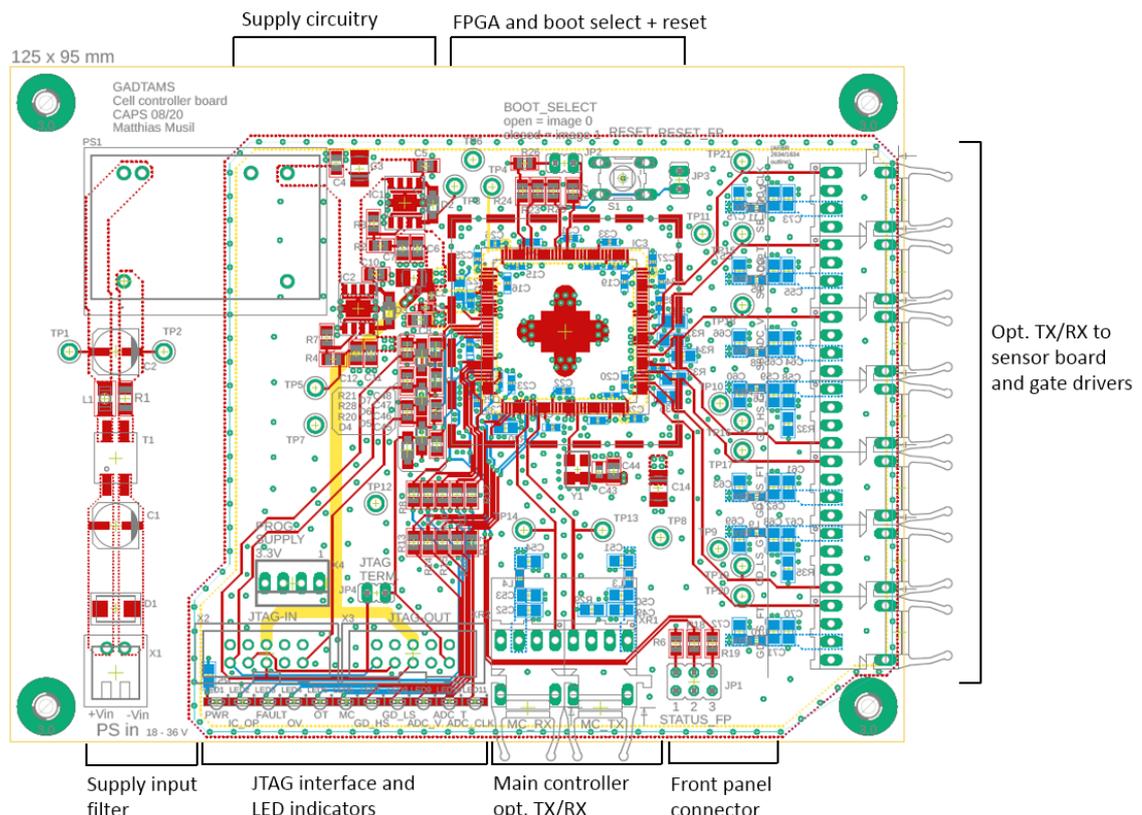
Cell controller board PCB layout, red = layer 1, purple = layer 2, yellow = layer 3, blue = layer 4
